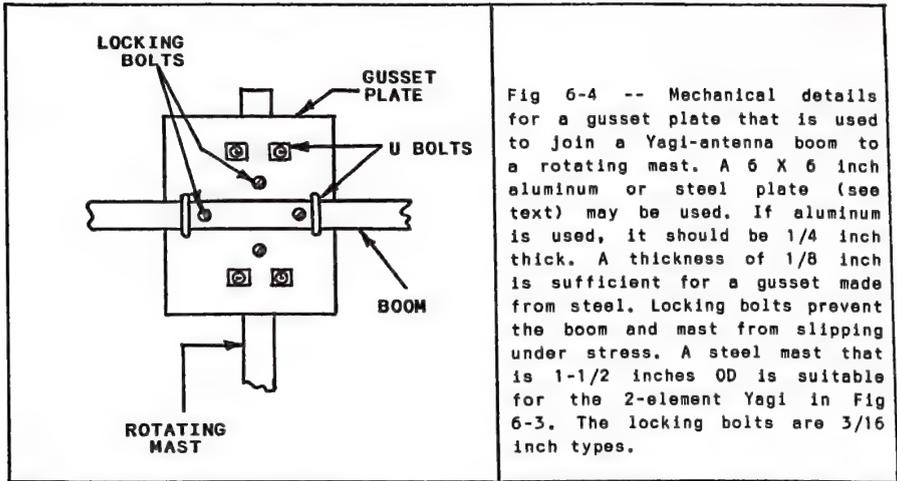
Mechanical details for a gusset plate that is used to join a Yagi-antenna boom to a rotating mast. A 6 X 6 inch aluminum or steel plate (see text) may be used. If aluminum is used, it should be 1/4 inch thick. A thickness of 1/8 inch is sufficient for a gusset made from steel. Locking bolts prevent the boom and mast from slipping under stress. A steel mast that is 1-1/2 inches OD is suitable for the 2-element Yagi in Fig 6-3. The locking bolts are 3/16 inch types.
